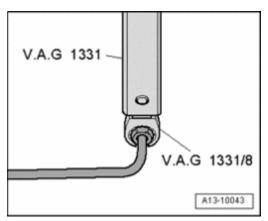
Fastening High-Pressure Line At Fuel Rail Using Torque Wrench V.A.G 1331 With Open End Wrench Socket V.A.G 1331/8
